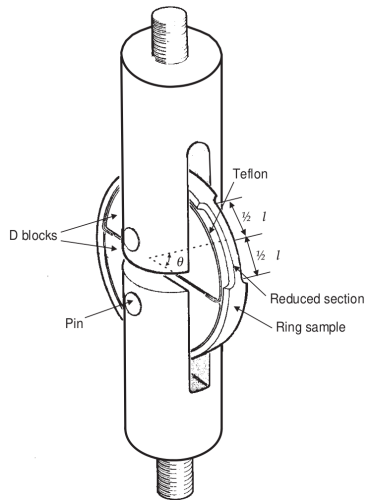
Schematic diagram of the experimental fixture for ring hoop tensile test [28].
